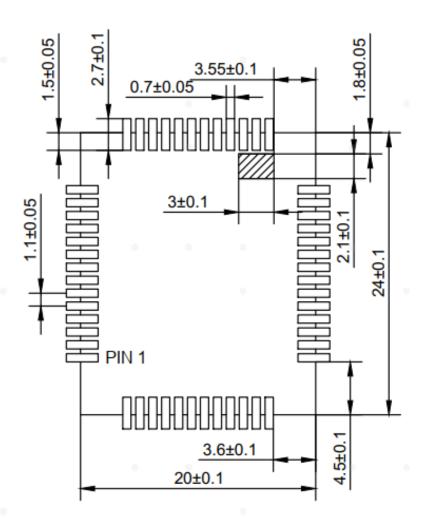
Bottom view of the N25 module PCB (unit: mm)
